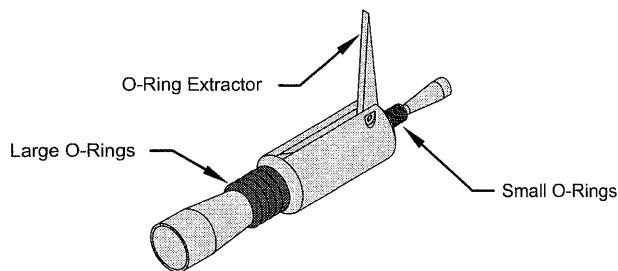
O-RING REPLACEMENT TOOL* - This is the *Ultraflow™* O-ring replacement tool with large and small O-rings.
